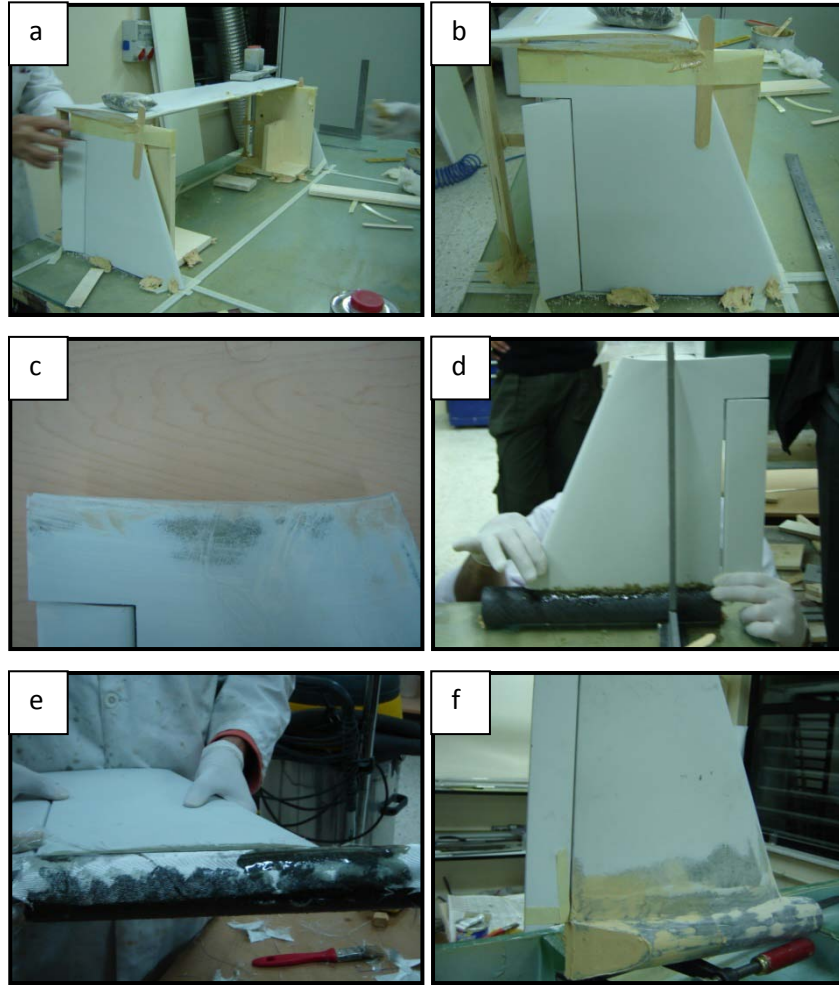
Tail assembly aligned with a jig (a), Connection surface is filled for complete match (b), Connection surface (c), Carbon fibre tube attached to the vertical tail (d), Tube attachment strengthened with glass fibre (e), Tube attachment surface finish (f)
